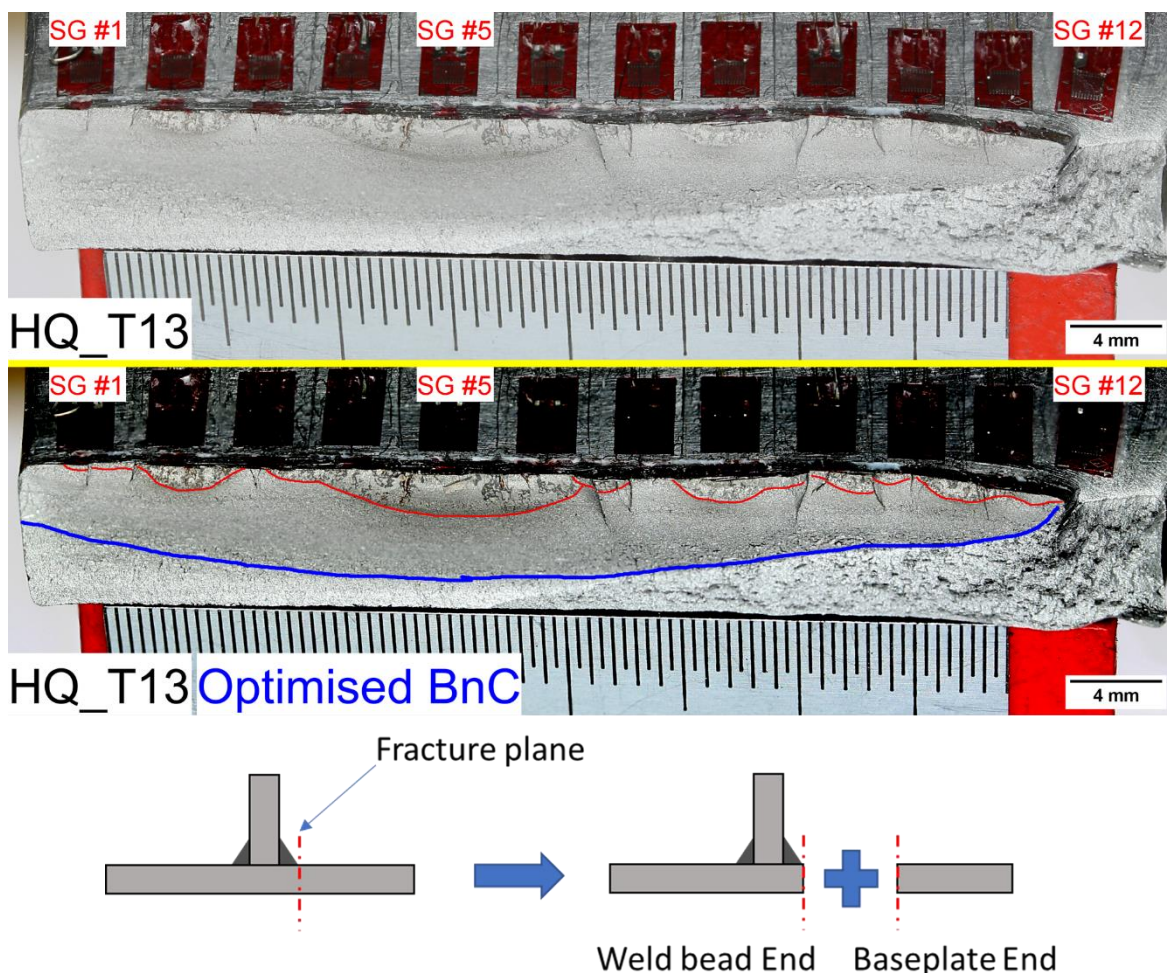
HQ_T13 - Fracture surface of the baseplate end of the specimen, highlighting multiple cracking. The middle image is optimised (brightness and contrast) for visualising the fatigue crack fronts. The bottom image is a schematic of how the specimens were labelled after complete fracture.
